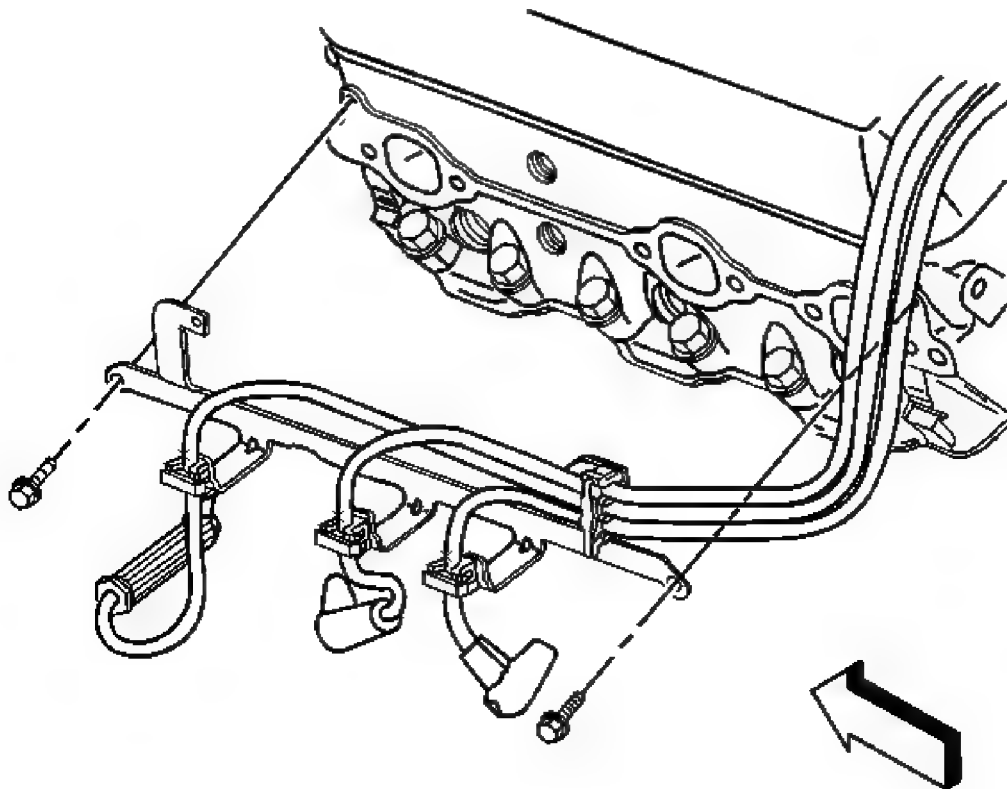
View Of Spark Plug Wire Retaining Bracket
